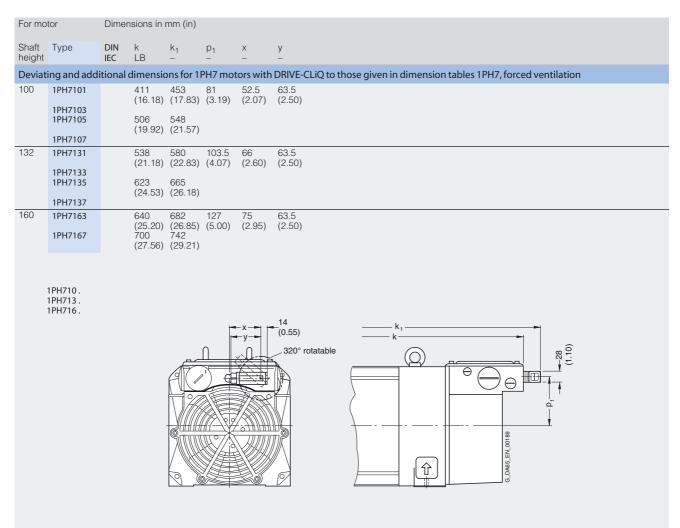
Deviating and additional dimensions for 1PH7 motors with DRIVE-CLiQ to those given in dimension tables 1PH7, forced ventilation
